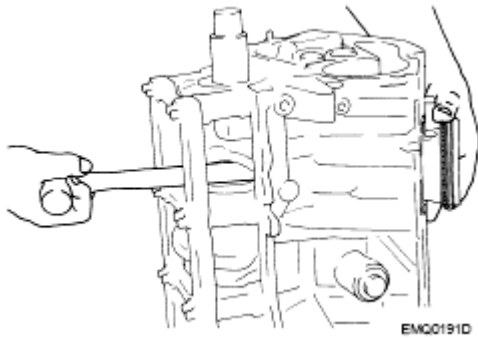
Pushing Piston And Connecting Rod Assembly Out To Cylinder Head Side
